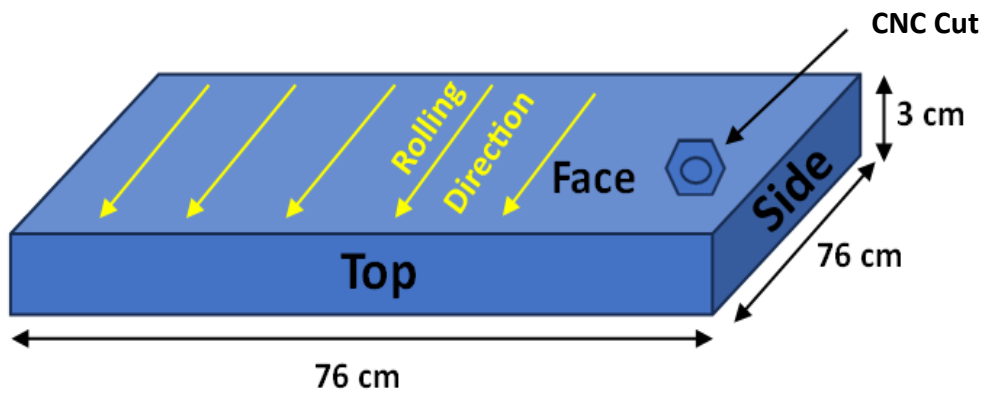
As received ArmoX 500T bulk material size, rolling direction, and CNC cutting surface for torsion specimen
